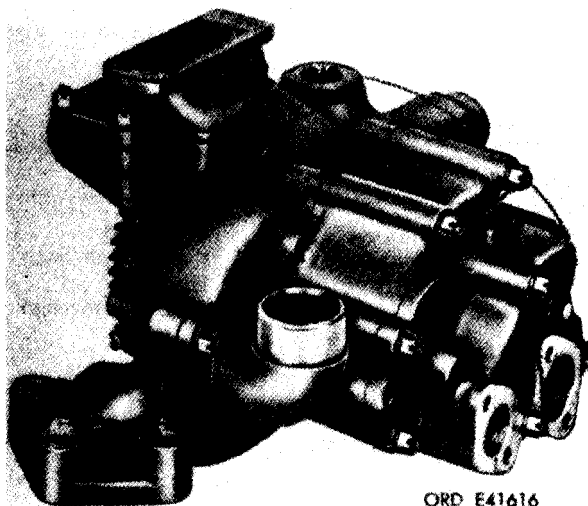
FSN 2815-895-6430 oil pump assembly as removed from engine.
